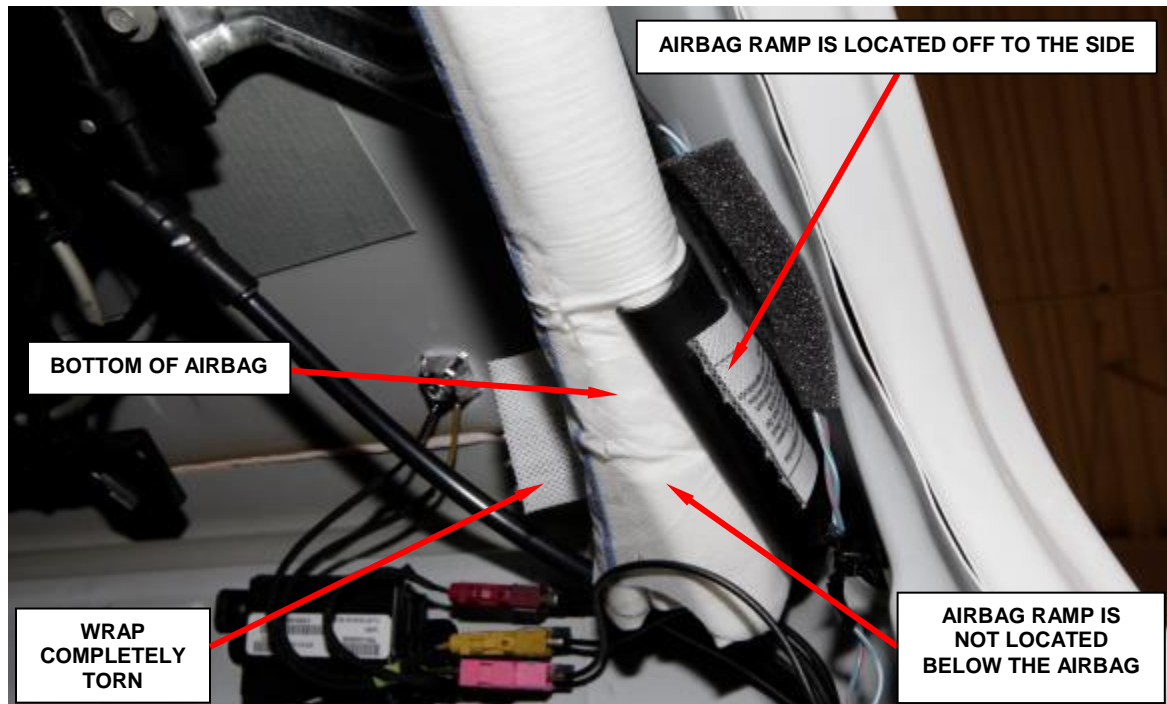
Failed Inspection: Airbag Ramp and Wrap
